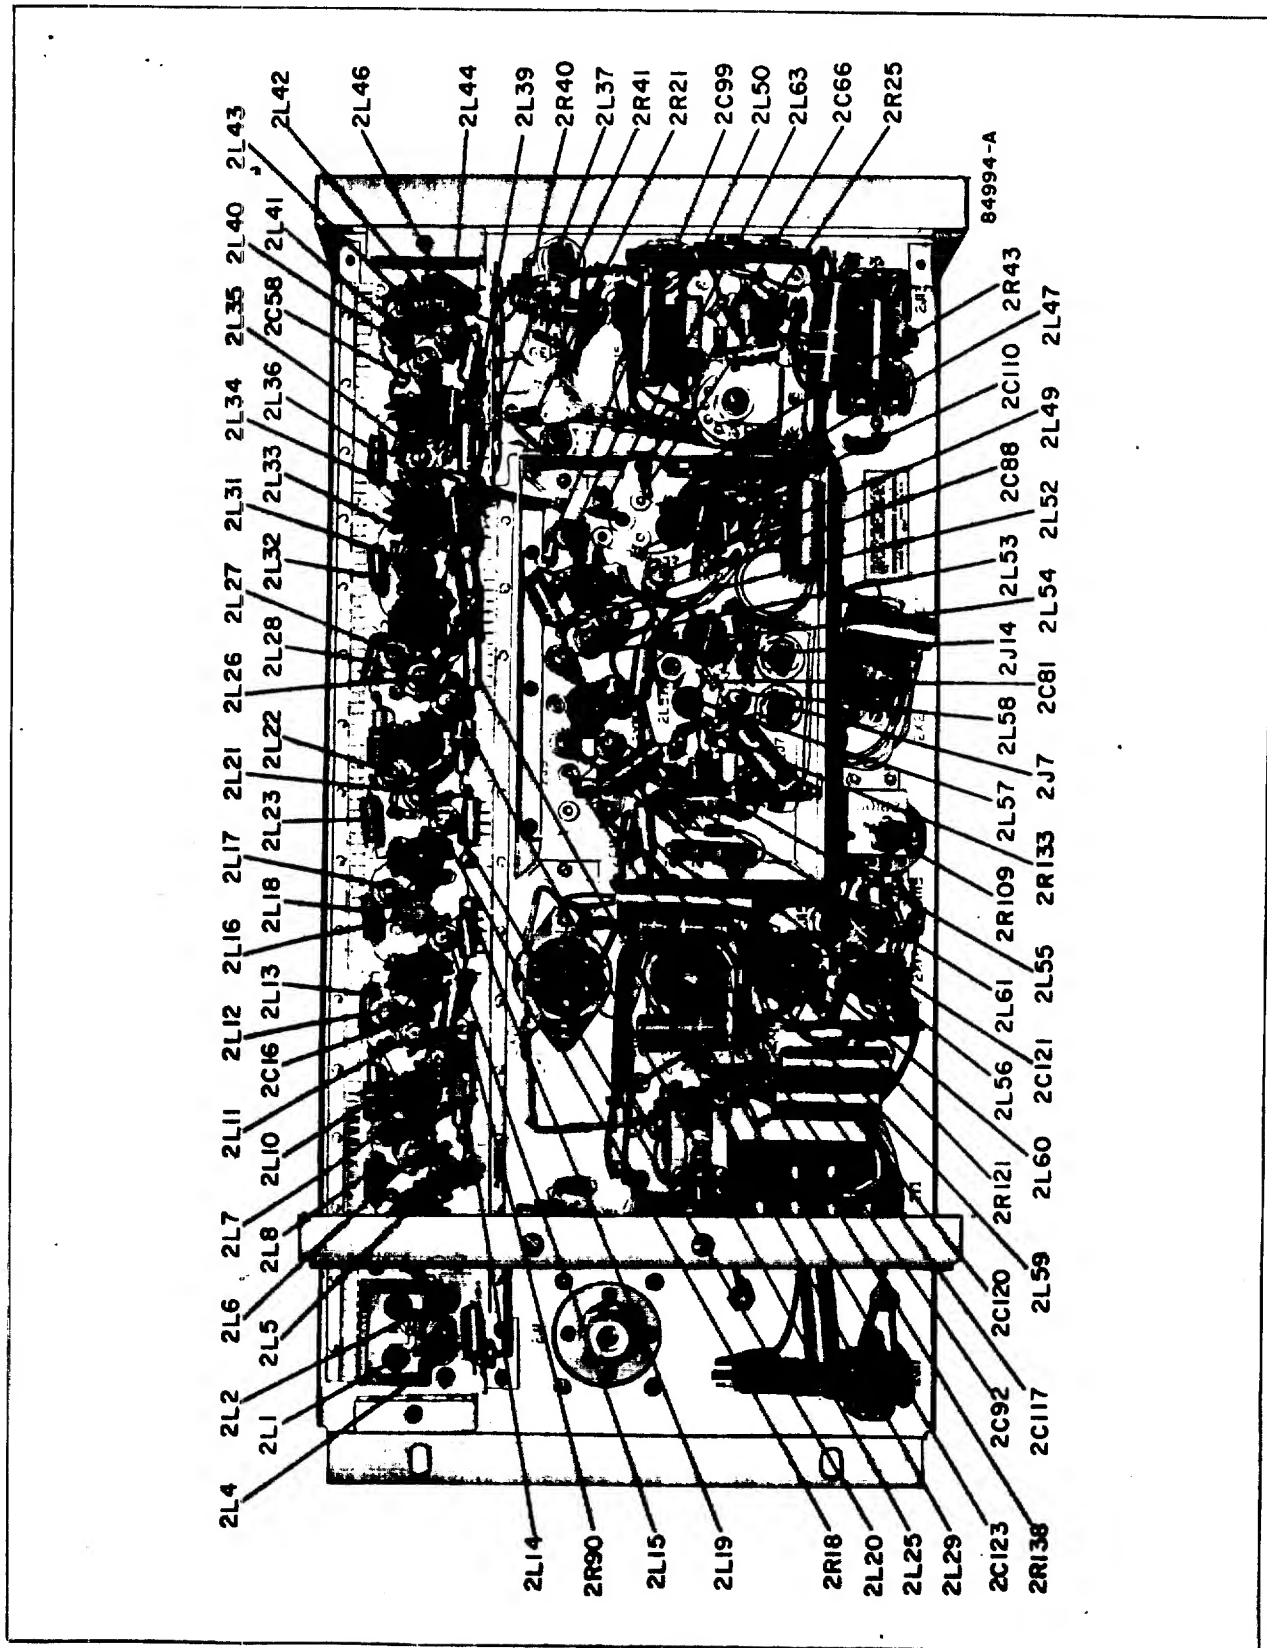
Receiver/Modulator—Rear View, Dust Cover and Shield Covers Removed
